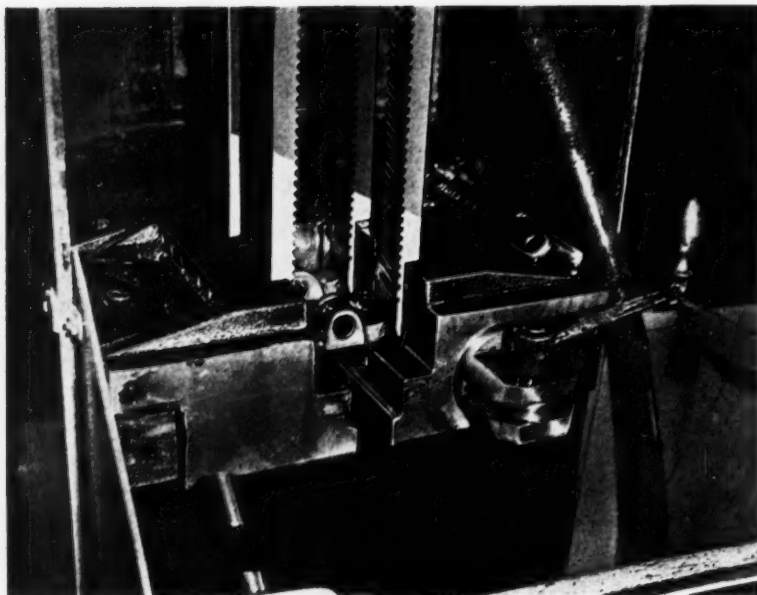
Four Broaches which are Guided at the Machining Points by Means of Slots in the Fixture Remove Stock from the Ends of the Steering Knuckle Lugs
